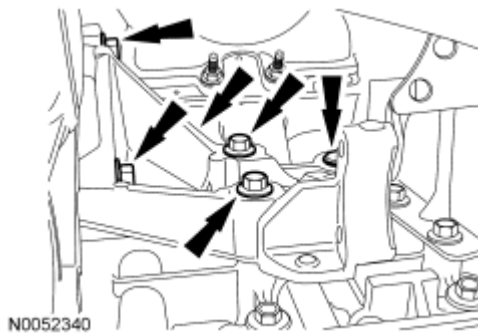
Locating Power Transfer Unit (PTU) Support Bracket & Bolts
